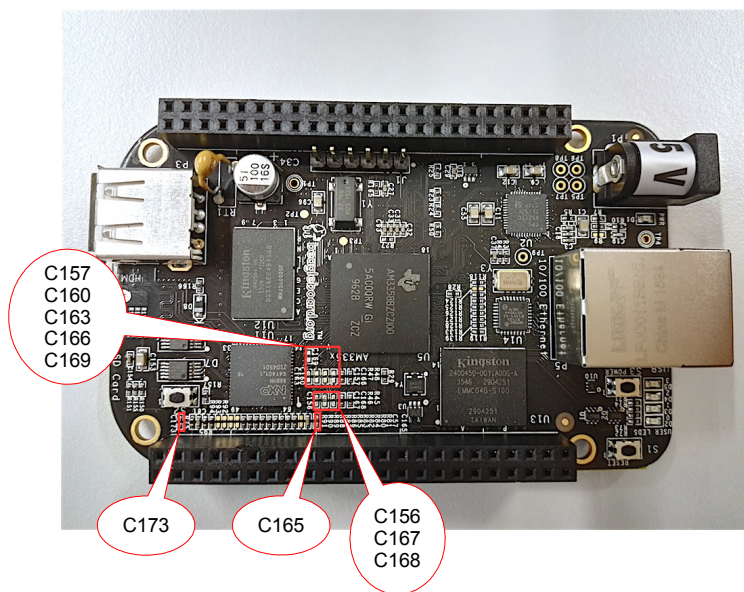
Marked capacitors are removed/disassembled from the Beagle Bone board top side
